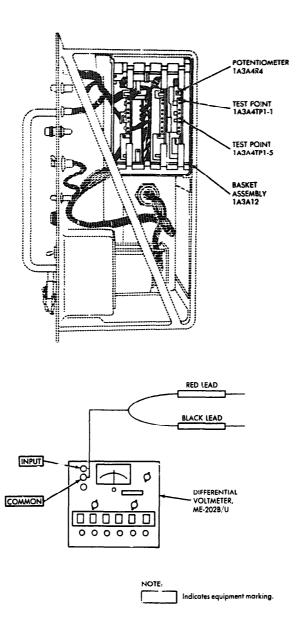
Low voltage regulator board assembly 1A3A4, adjustment and test points.
